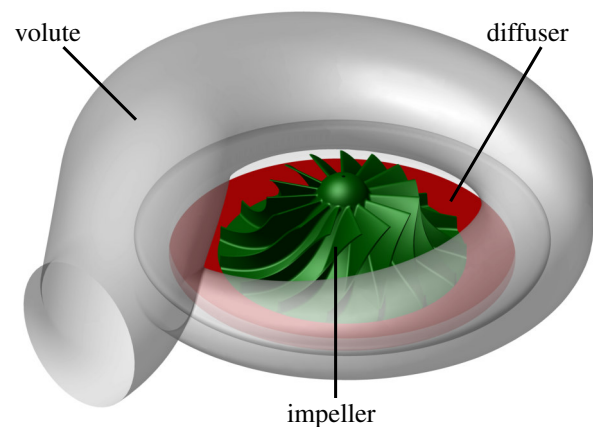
Overview of the investigated compressor with the vaneless diffuser and the volute
